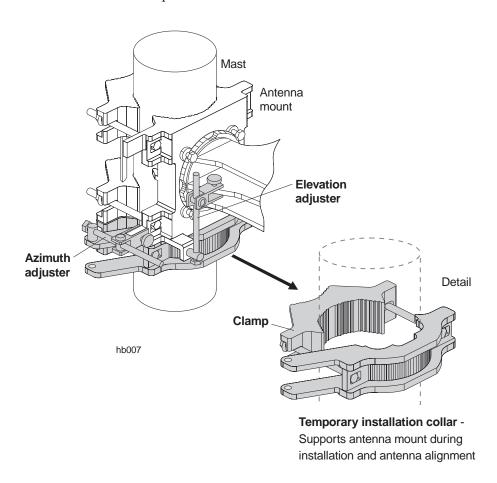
Tools included in ODU installer tool kit (all shaded parts)
